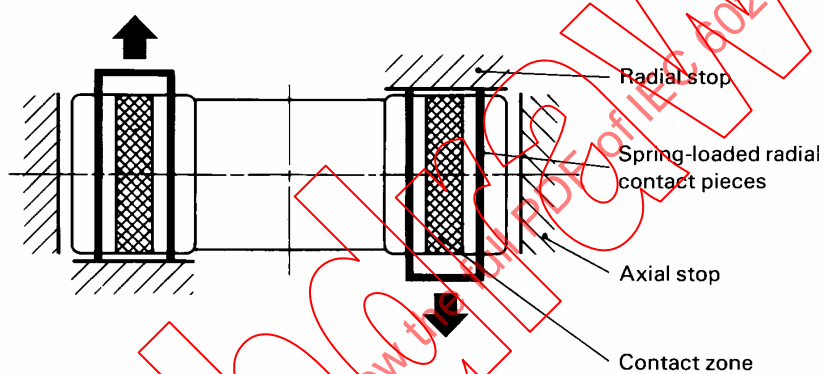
Fuse-links with cylindrical contact caps with striker –
